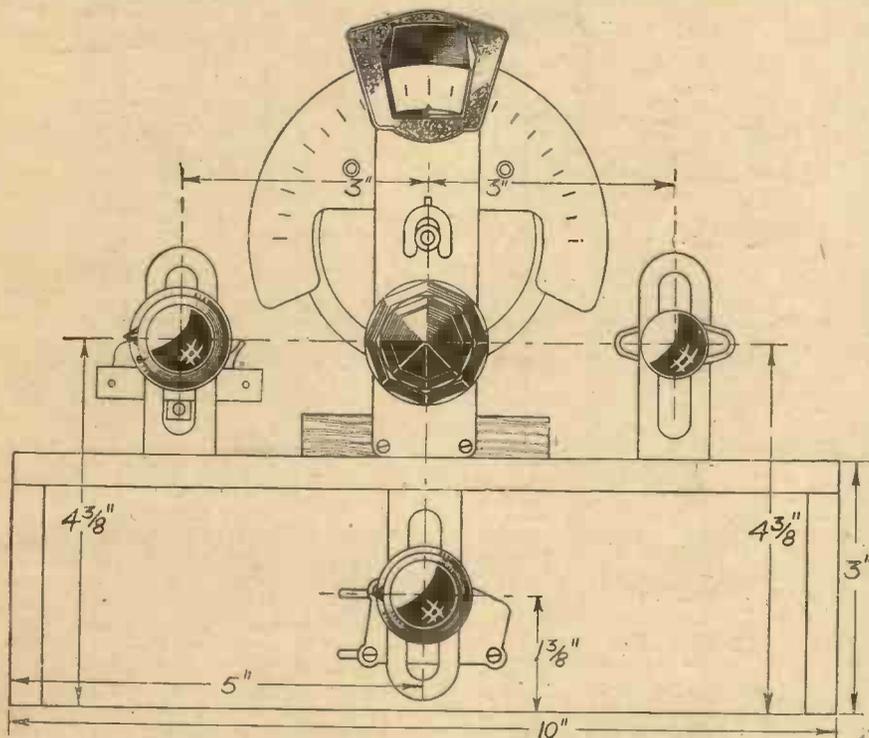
These dimensions will enable you to drill the cabinet front or the panel. The maker's template should be employed when marking out the hole for the escutcheon.
